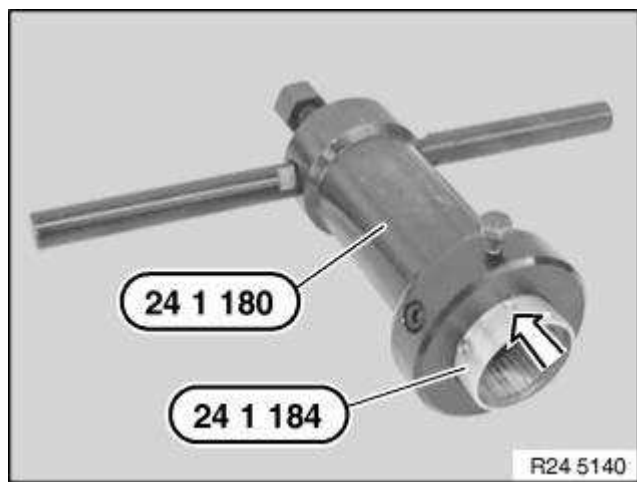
Slide Special Tool 24 1 184 Completely Into Puller 24 1 180
